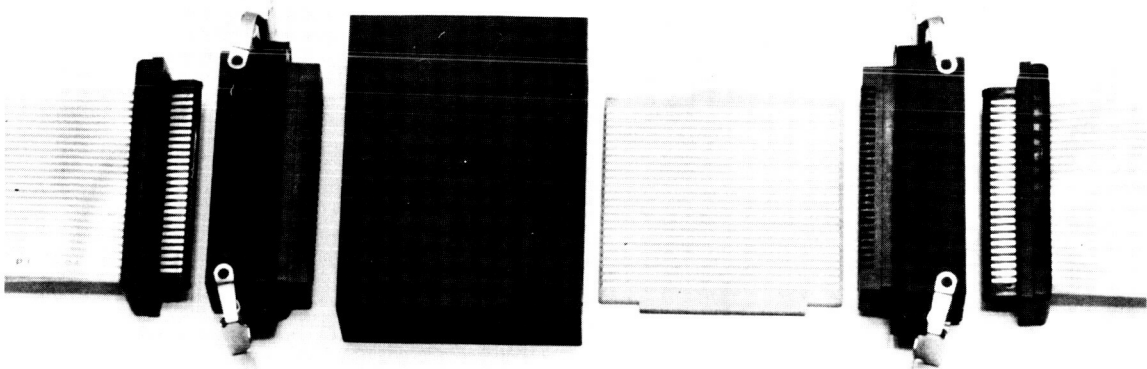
UNASSEMBLED CONDUCTOR CHANGE DEVICE (PC BOARD)
